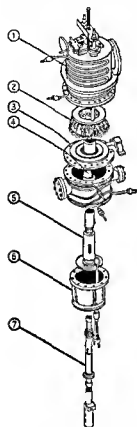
Isometric sketch of disassembled resonator (1) Tuner housing, (2) tuning plunger ("daisy"), (3) anode, (4) screen-grid assembly, (5) control-grid assembly, (6) cathode and grid insulator, (7) cathode assembly.
